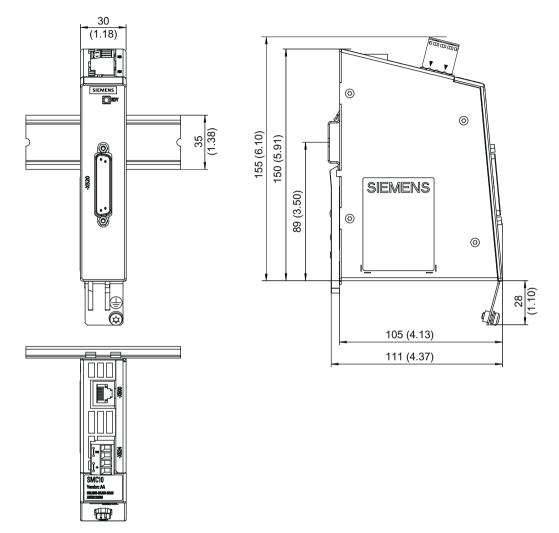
Dimension drawing of the Sensor Module Cabinet SMC10, all dimensions in mm and (inches)
